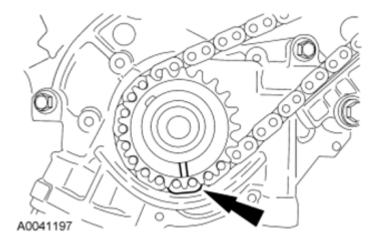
Installing Crankshaft Sprocket And Lower End Of LH (Inner) Timing Chain Courtesy of FORD MOTOR CO.
